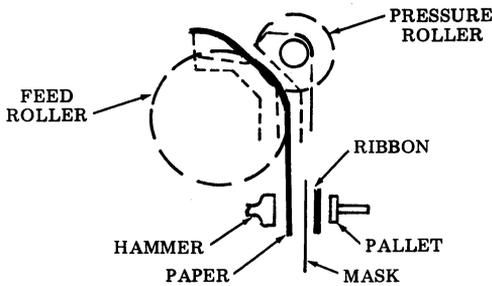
Friction Feed Printer Equipped With Noise-Reduction Parts
